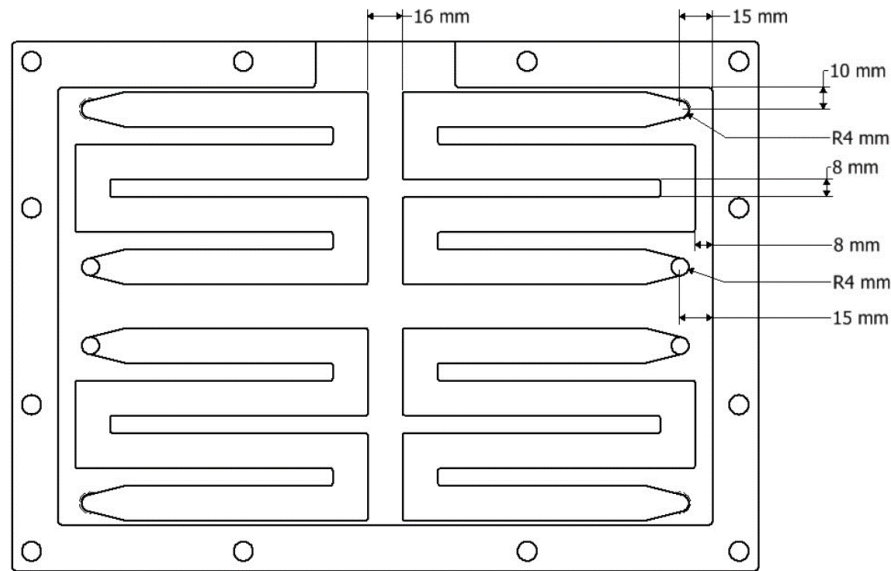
2D drawing of the optimized dumping cell and geometric constraints used to optimize the dumping cell design.
